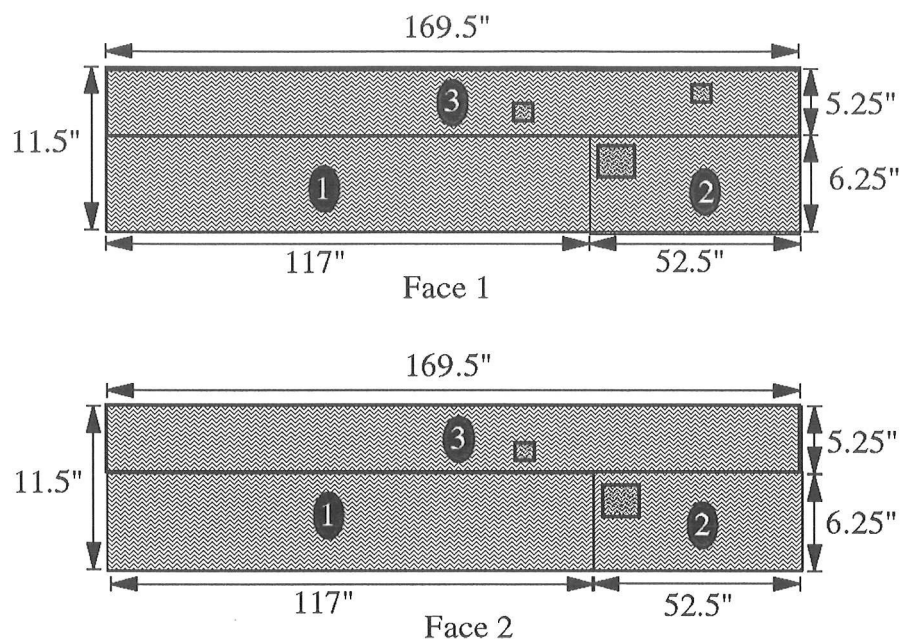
Division-based remanufacturing solution producing: Board 1, FAS (5 BF); Board 2, 1 Common (2 BF); Board 3, Selects (6 BF).
